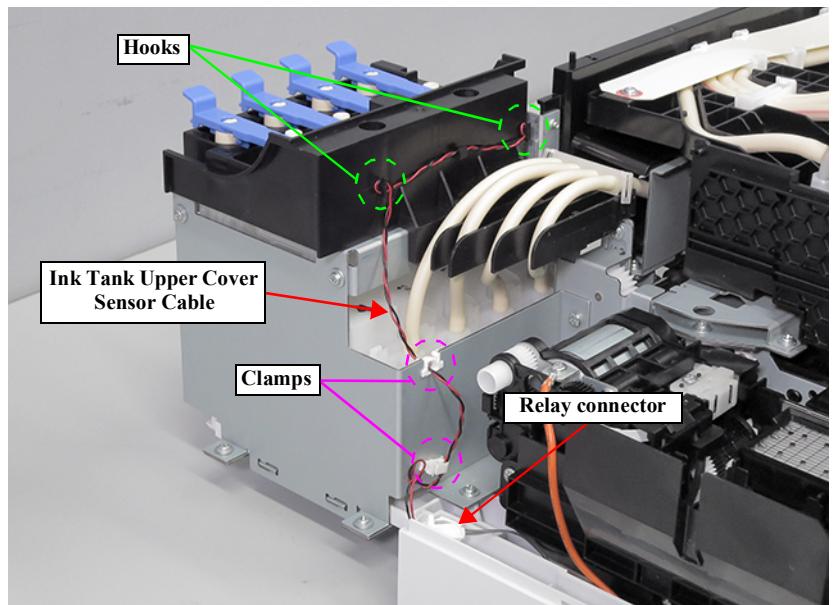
Releasing the Ink Tank Upper Cover Sensor Cable
